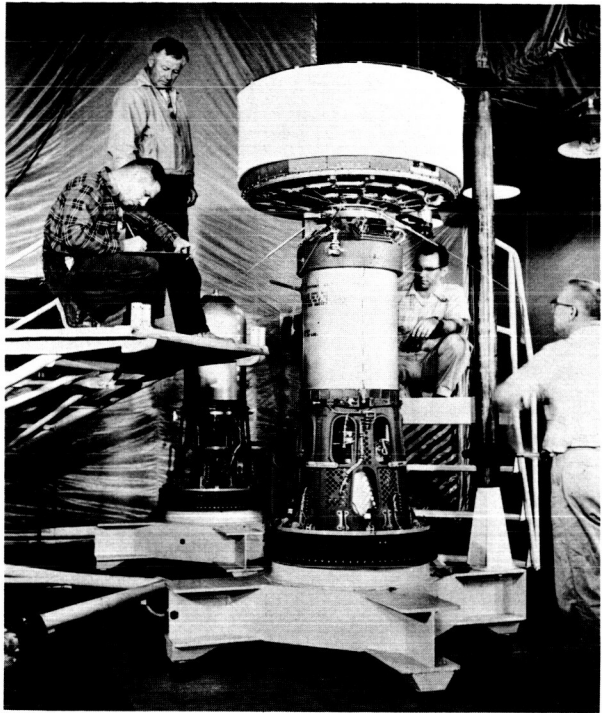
Clearance check of the third stage and satellite assembly.
